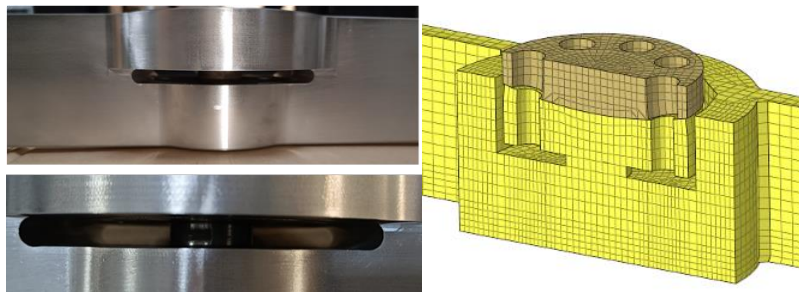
Frontal view of the central cylindrical flexor, obtained through a combination of semi-finishing milling and EDM techniques.
